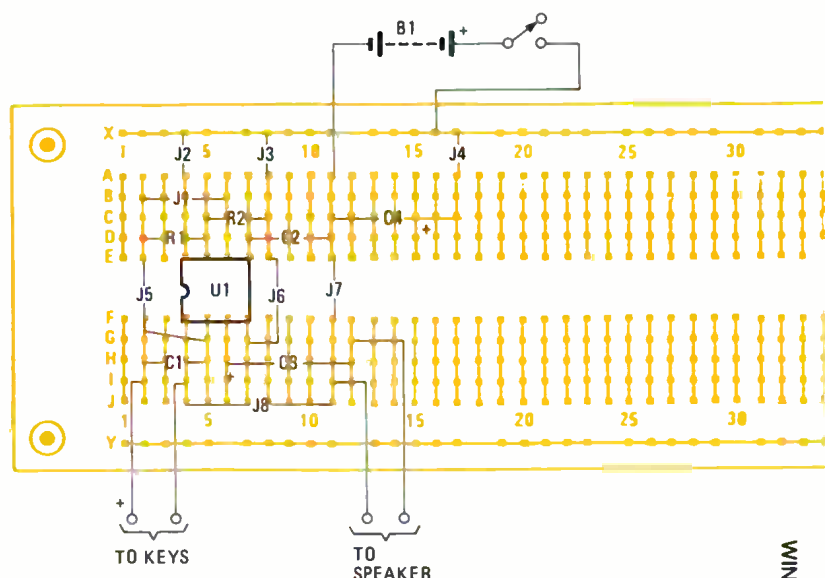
Any construction technique can be used to build the Toy Organ. The prototype was built on solderless-circuit (prototyping) board and a suggested parts layout is detailed here.
